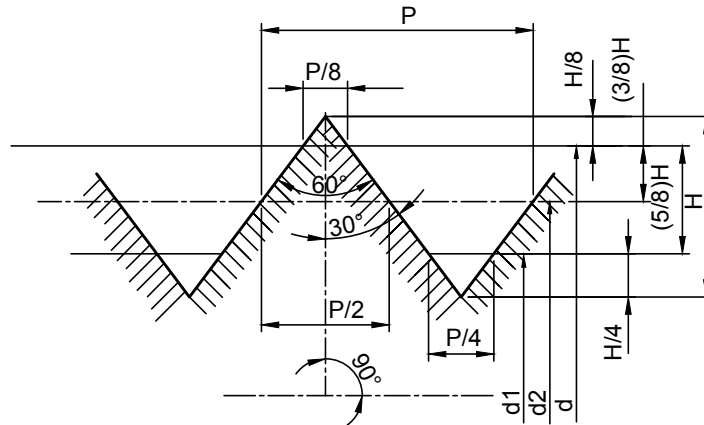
BASIC FORM AND PRINCIPAL DIMENSIONS FOR TYPE 4 TAPER THREADS
